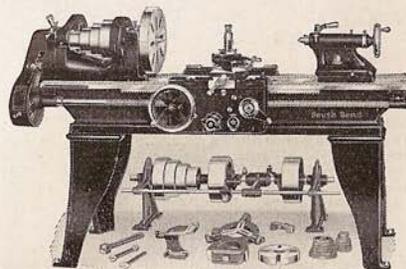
16" x 6' Countershaft Drive Lathe. Prices listed at right.
